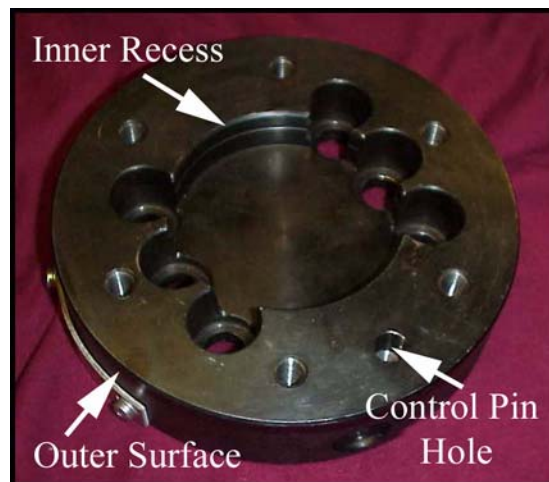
Flange Interface on ABB IRB6400 Robot
